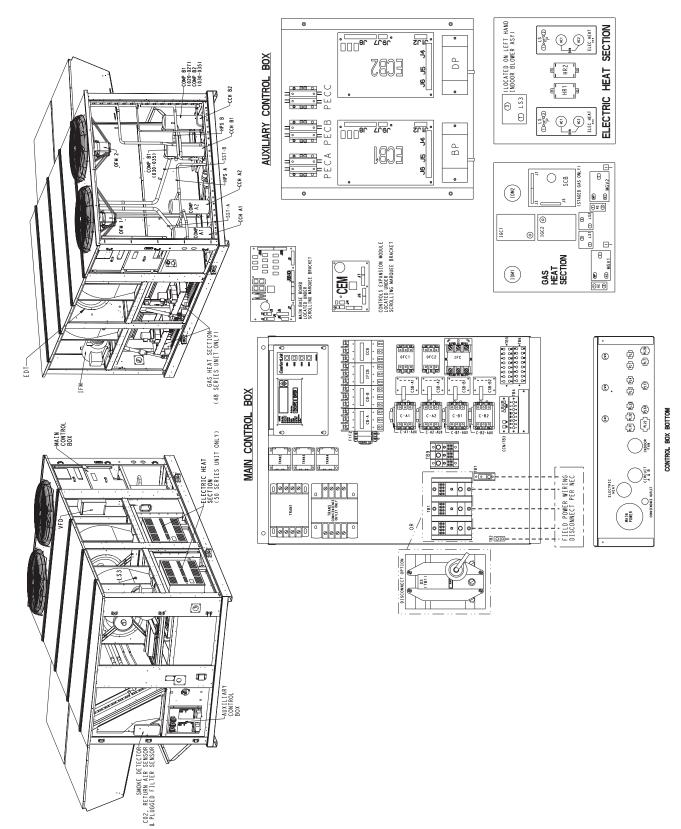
Typical Small Chassis Component Location (Size 020-035 Units)
